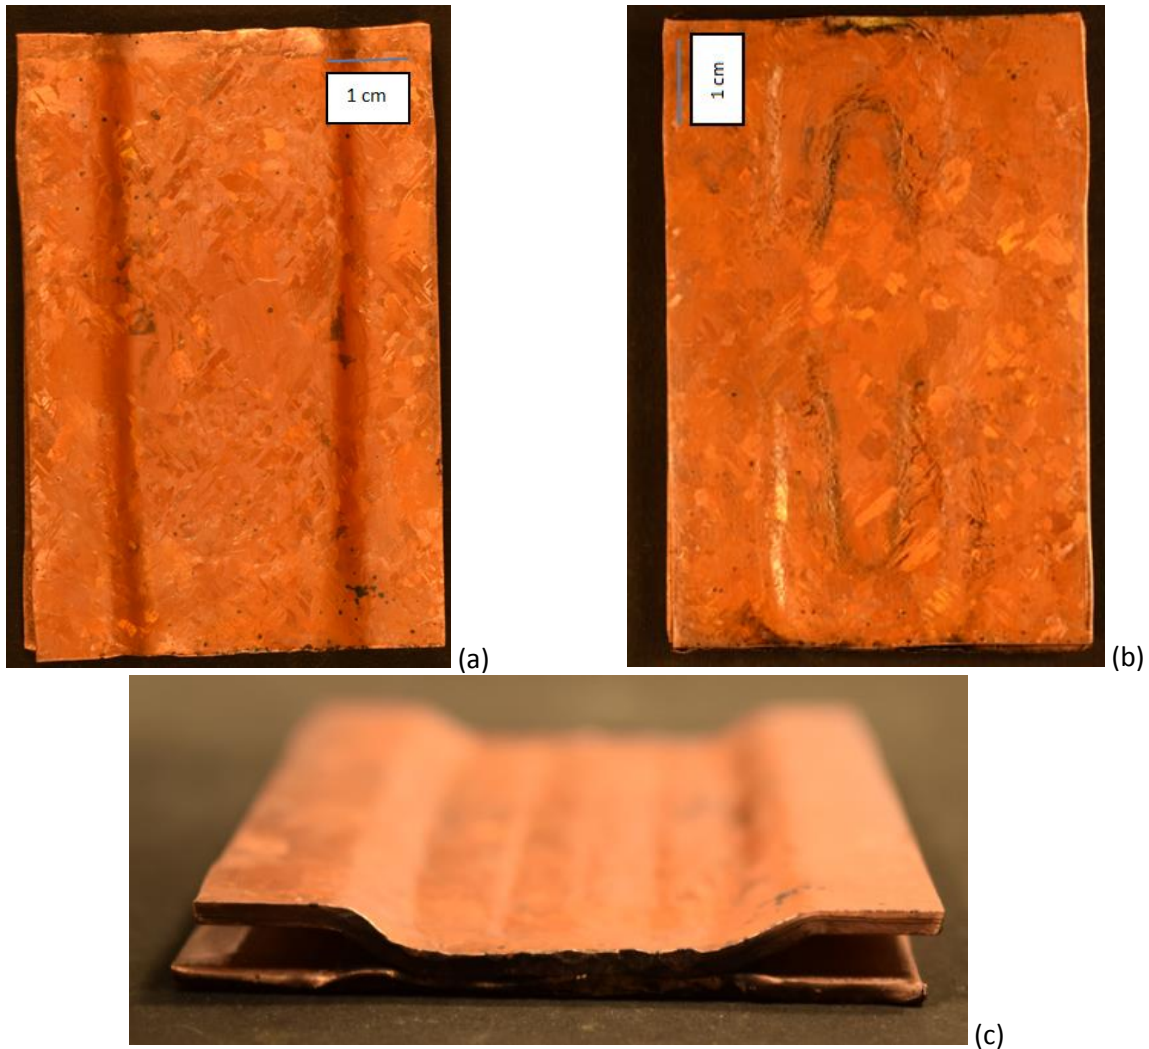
Welded 0.063" to 0.063", showing the (a) back of the flyer, (b) back of the target, and (c) the whole weld.
